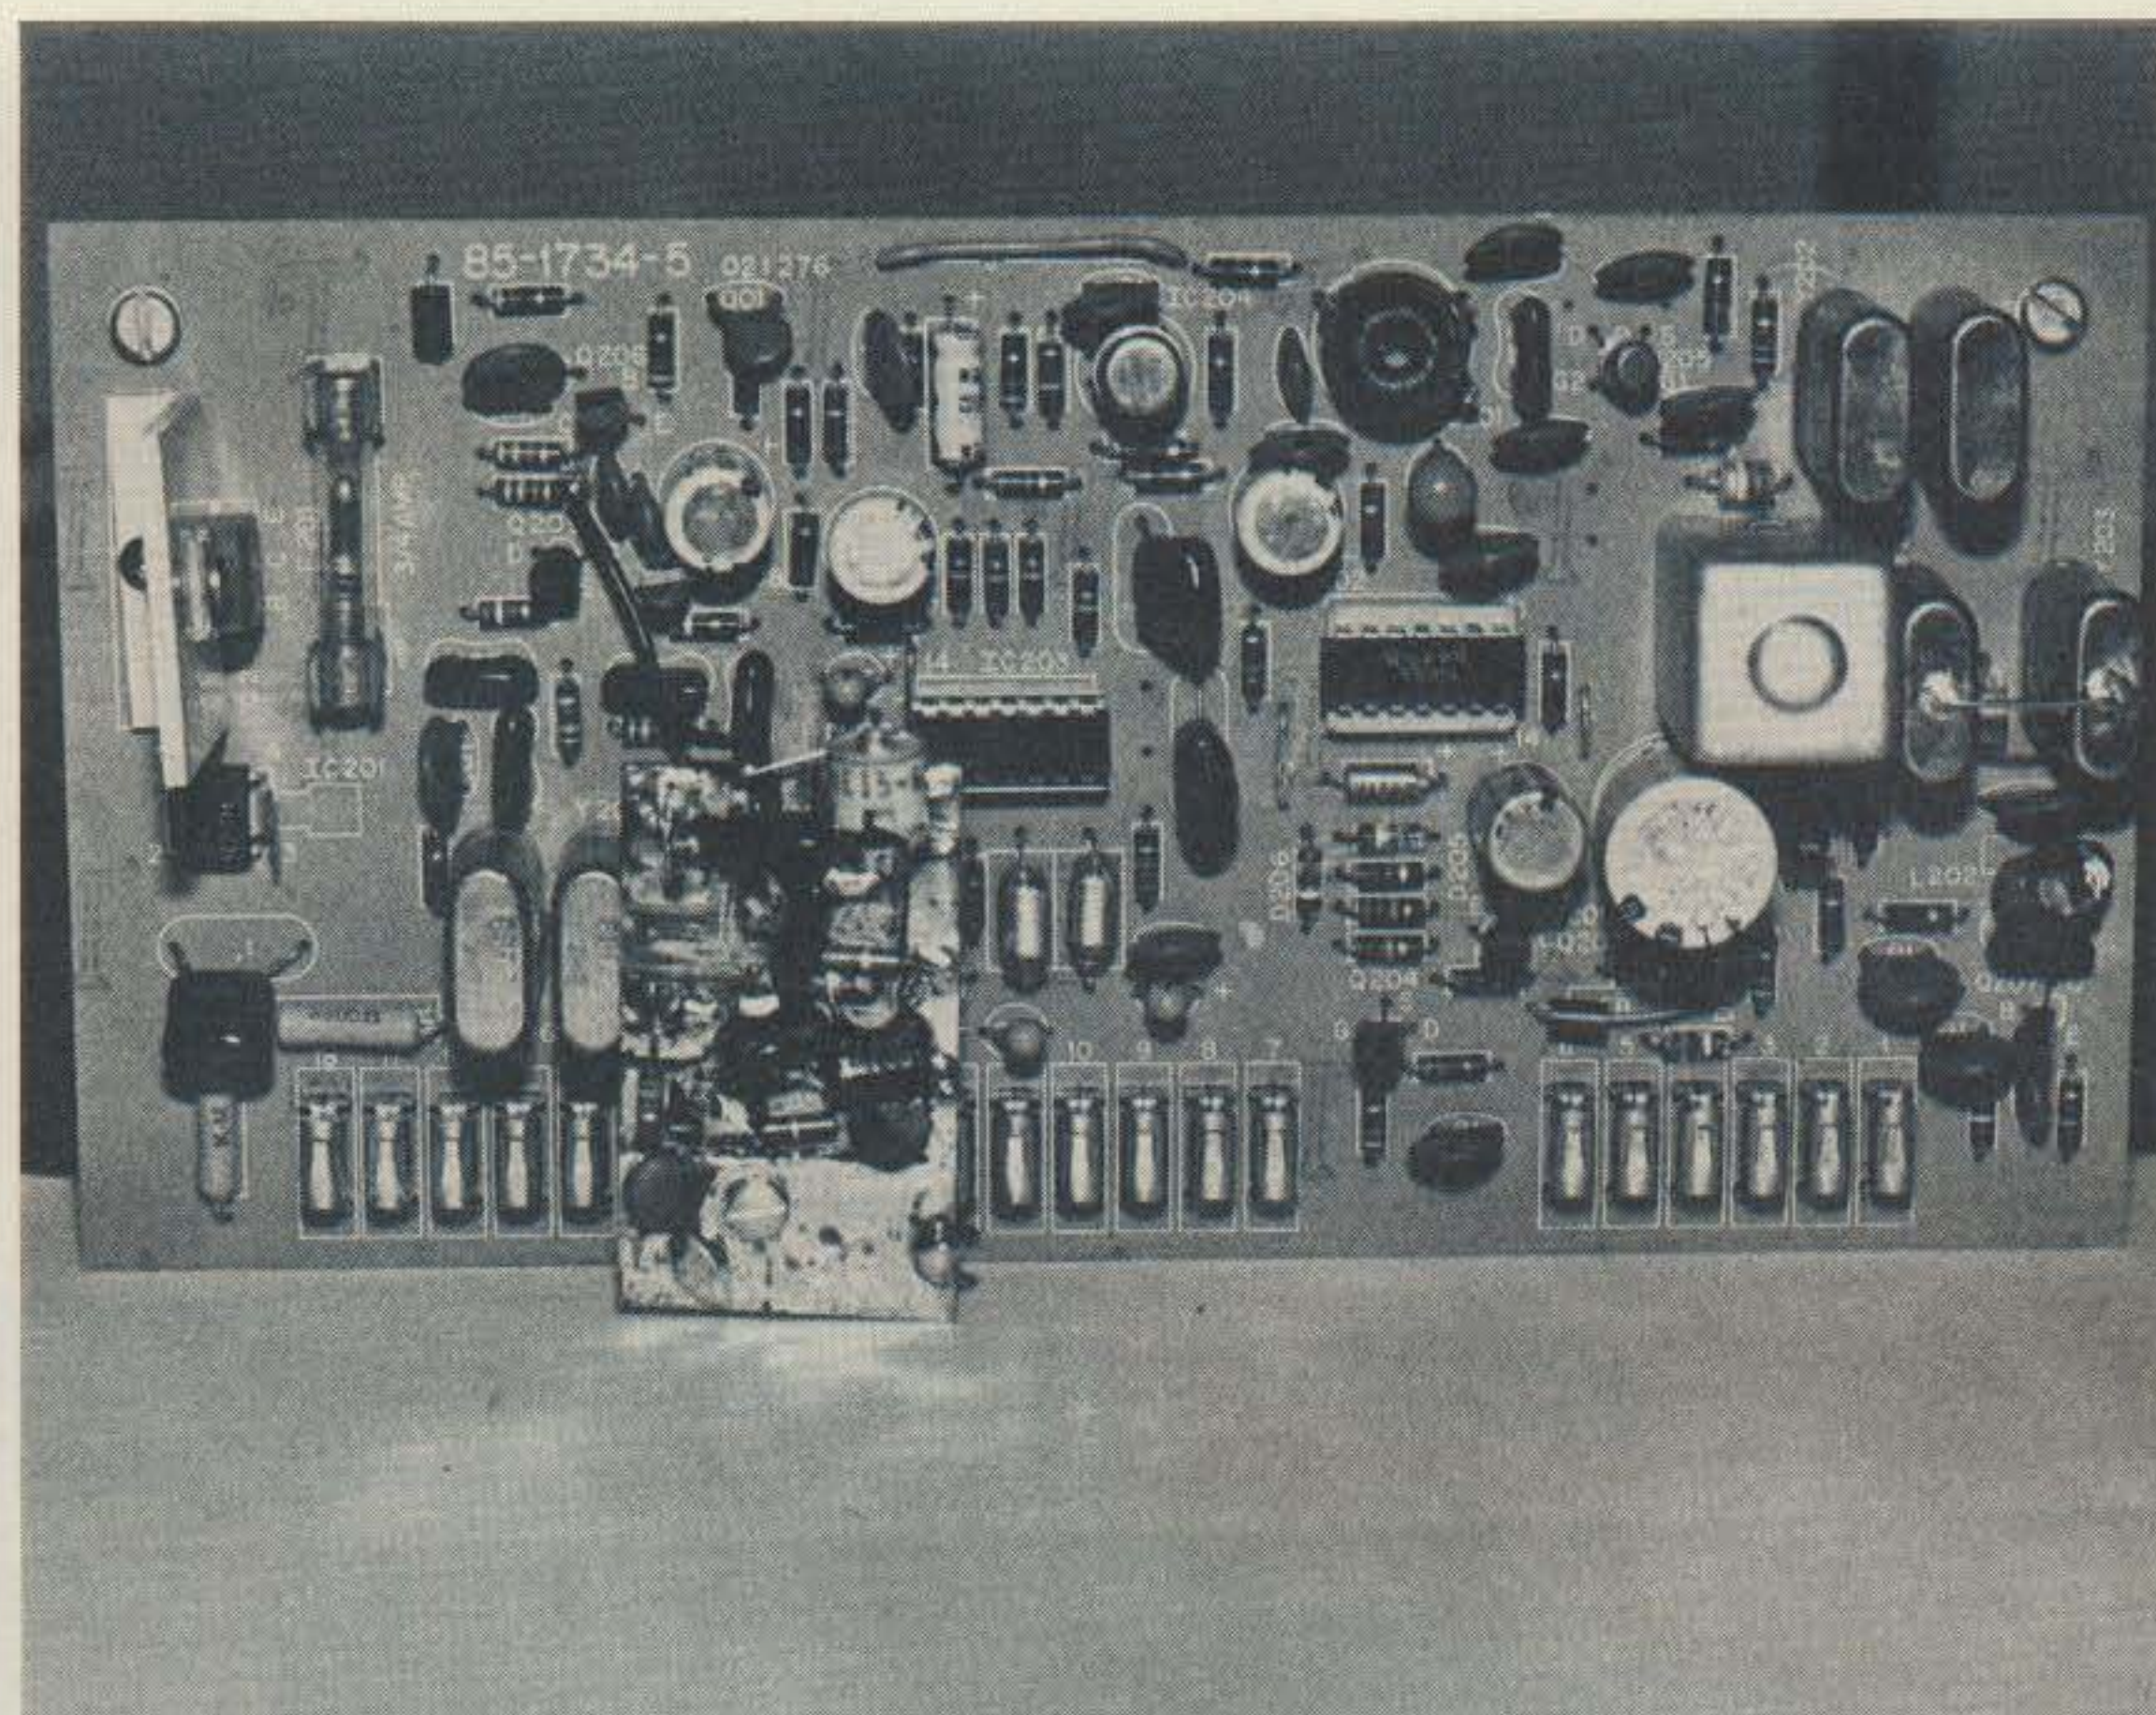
Photo C. Component-side view of AUD/REG board with new CW bfo board attached.
